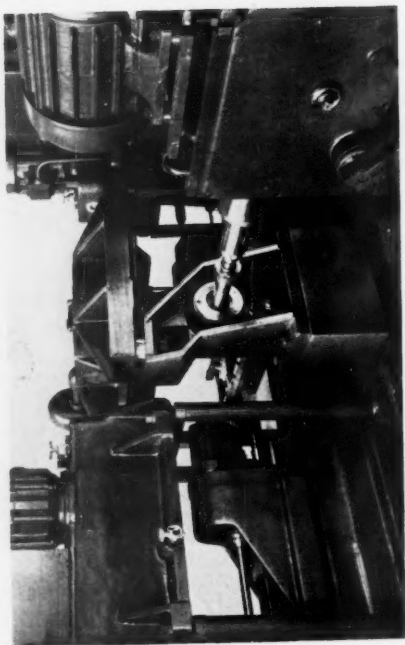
The rear of an Archdale three-way machine showing the outfeed tool
